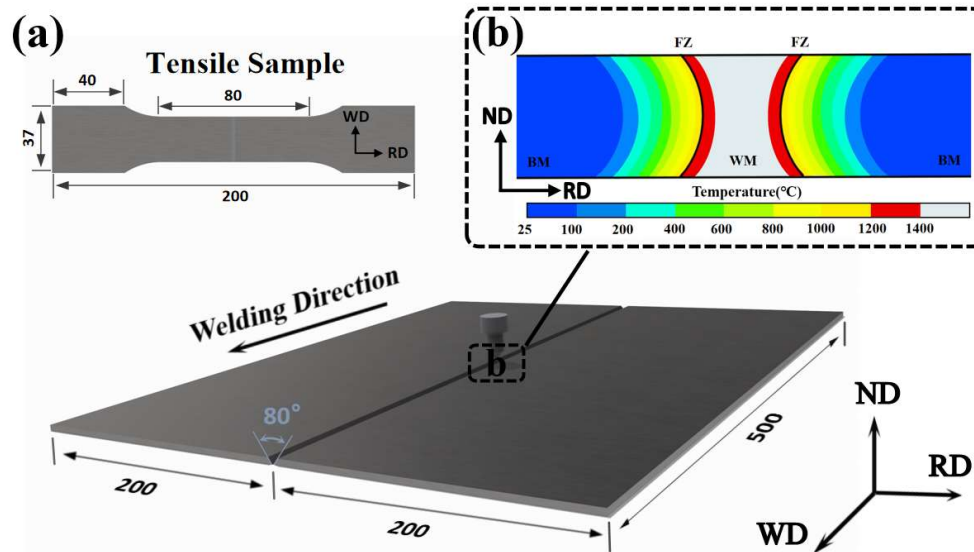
(a) Schematic of welding method and tensile sample and (b) welding temperature distribution [26-28]
